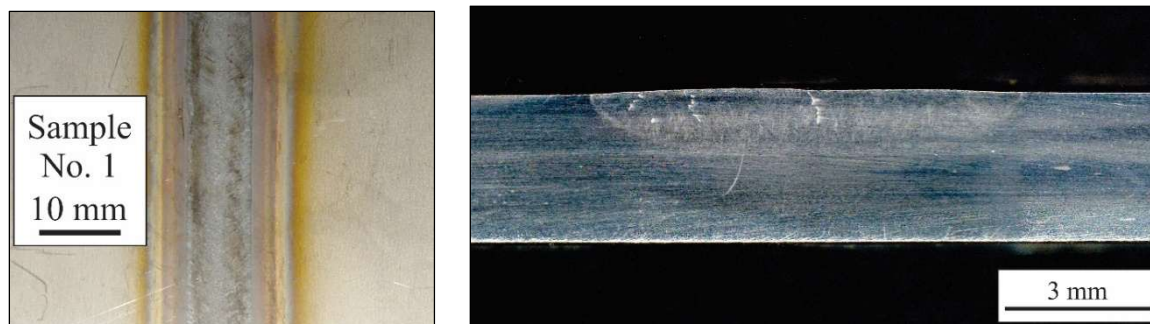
Specimen N° 1 - TIG, 220 A, no filler material
